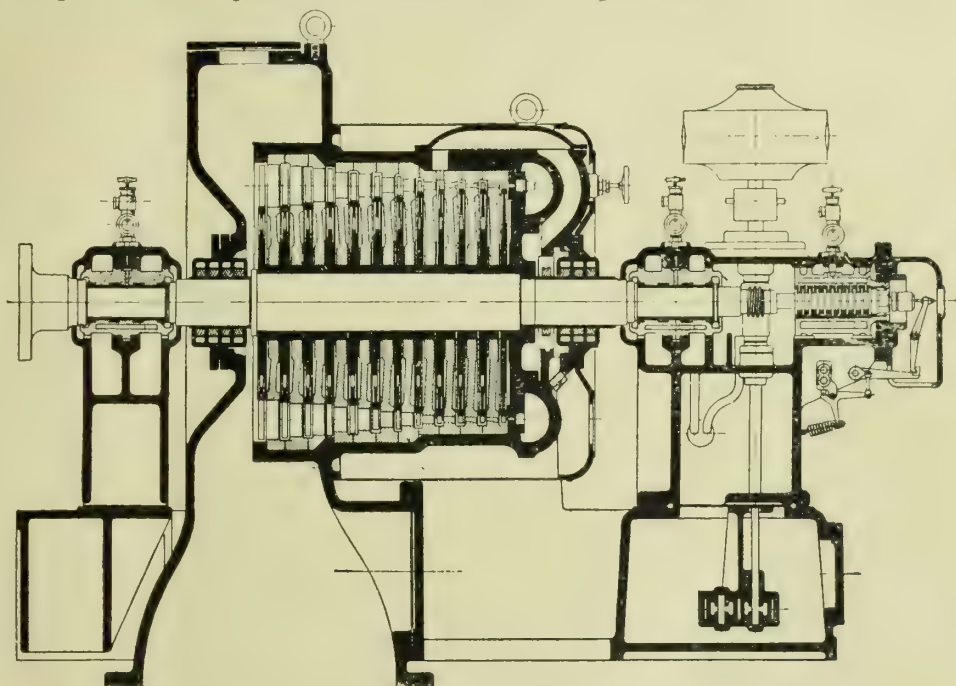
AXIAL SECTION, SHOWING GENERAL ARRANGEMENT OF THE DE LAVAL MULTISTAGE STEAM TURBINE.
